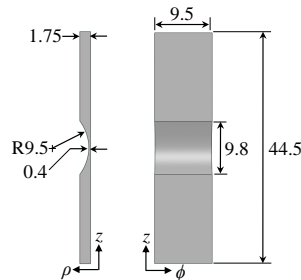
Dimensions (mm) of the single-shallow-notch fatigue specimens.
